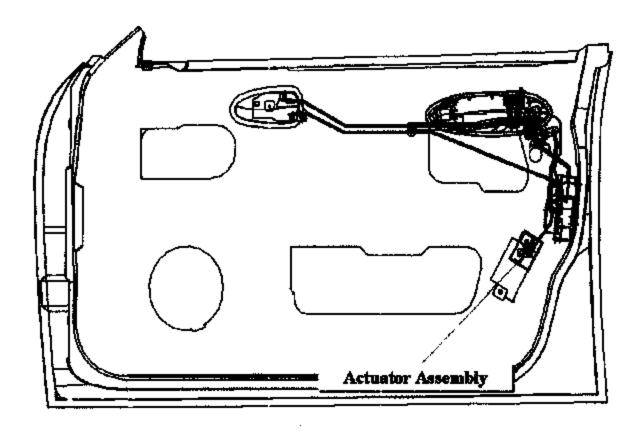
Installation of Lock Actuator Assembly (Source: KMC)
